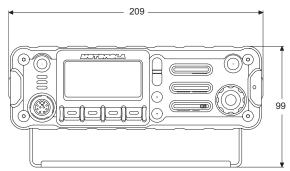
Front View of O2 Control Head with Remote Mount and Trunnion
